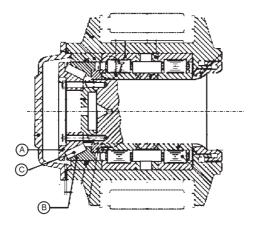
End Axle box- With Resilient Thrust Unit
